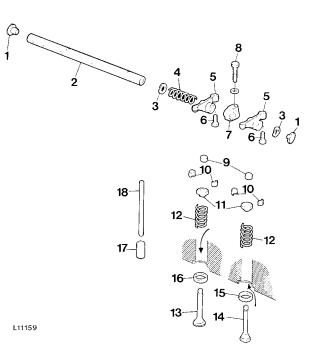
Rocker Arm Shaft Assembly and Valves, Exploded View
